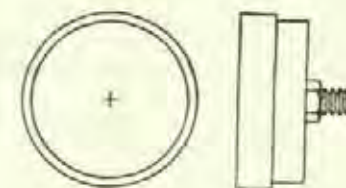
DIRECT MOUNTING GAUGE WITH BACK CONNECTION
